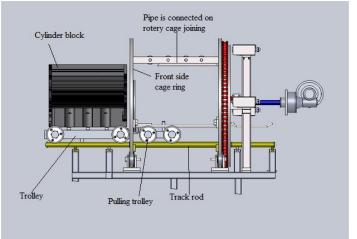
Front view showing pipe is connected to rotary cage joining plate
